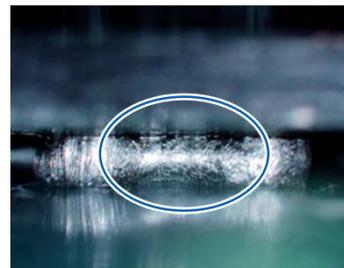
Solder melts and flux deterioration is controlled using a low-speed fan.
